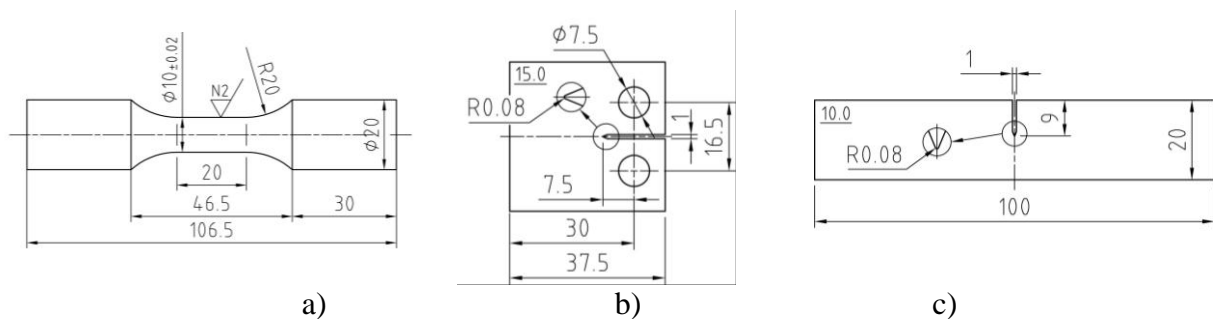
Shape and dimensions of specimens: a) cylindrical specimen for monotonic and cyclic testing, b) CT specimen and c) SENB specimen
